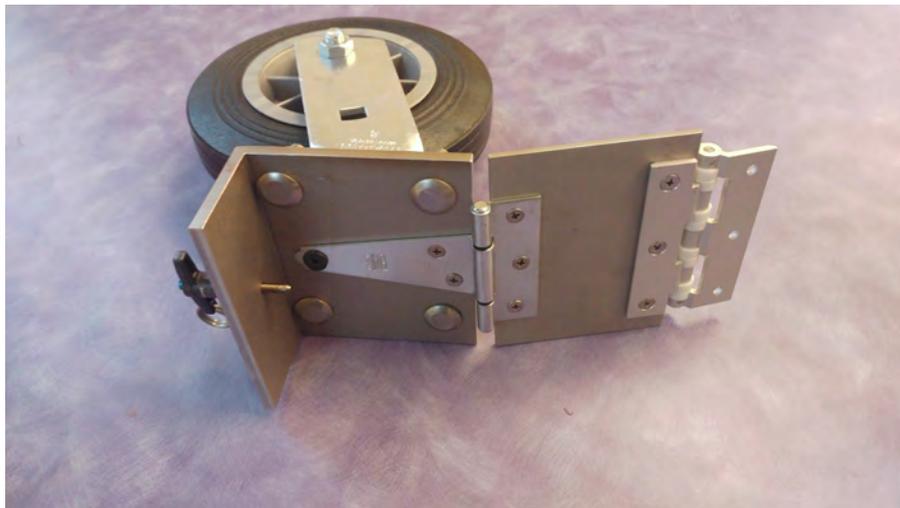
Custom wheel attachment mechanism after drilling the pin hole and flattening the bolts
